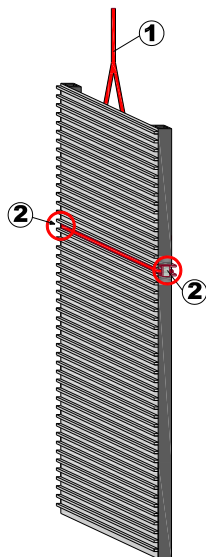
Erecting the side part using auxiliary equipment, such as a forklift
